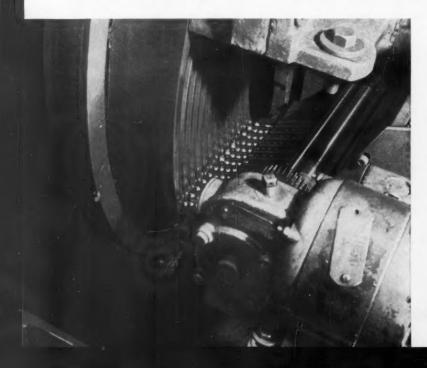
Close-up view of the feeding unit on finish-grinding machine seen in Fig. 7. The unit spaces and directs balls between grooves on faces of grinding wheel and pressure disc
